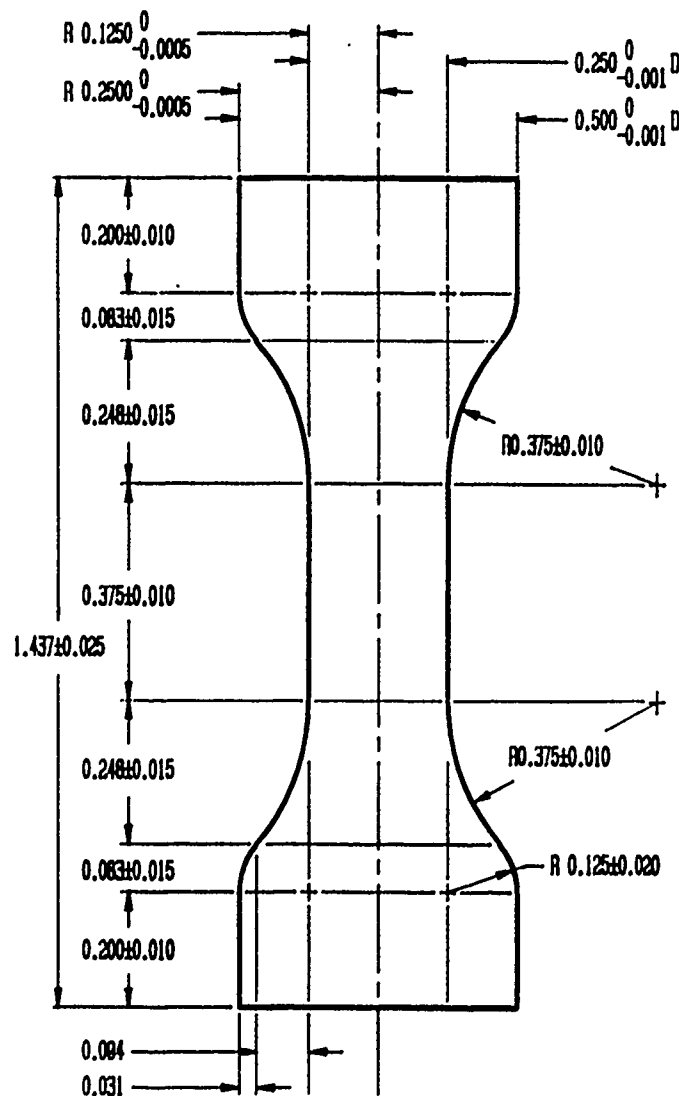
Compression test specimen size A. Scale: 1 in. = 0.25 in.
